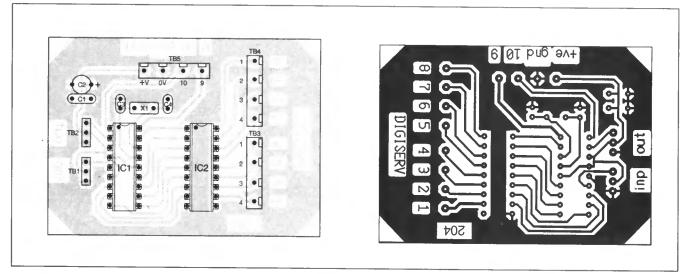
Digiserv printed circuit board component layout and full size copper foil master.
